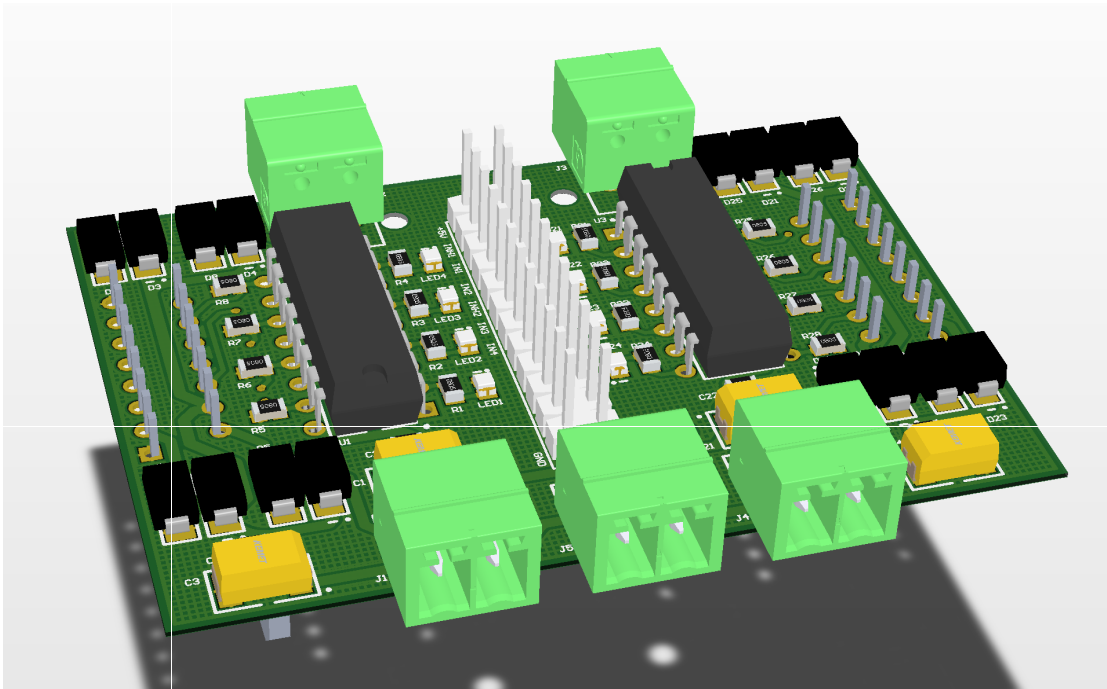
NON-A blimp V2 motor driver board (second version) design 3D view
